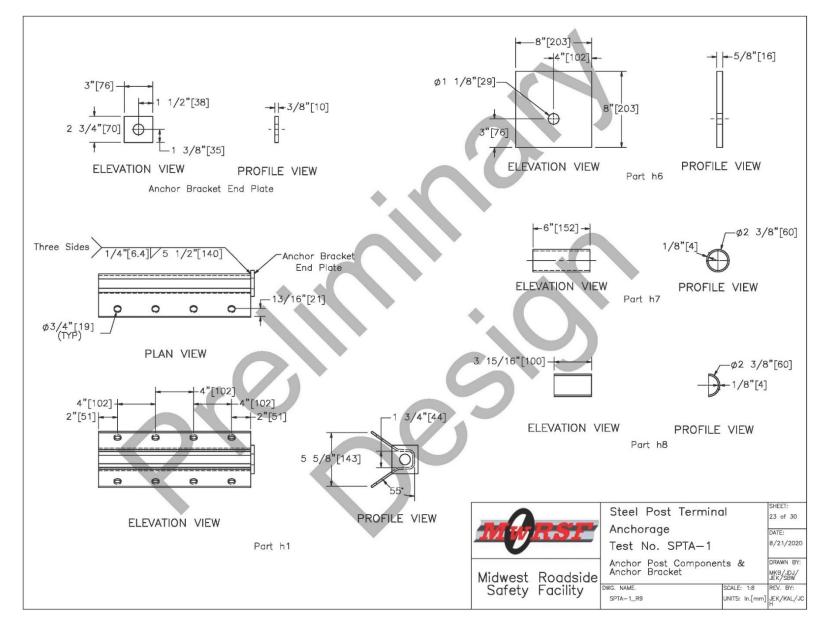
Anchor Post Components and Anchor Bracket, Test No. SPTA-1
